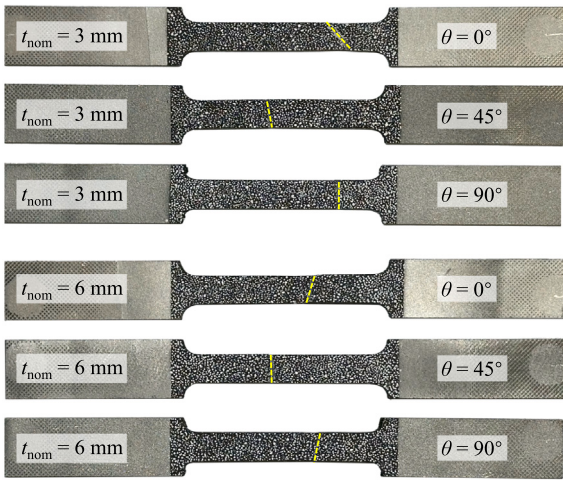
Fractured tensile coupons after testing; yellow dashed lines indicate fracture locations.
